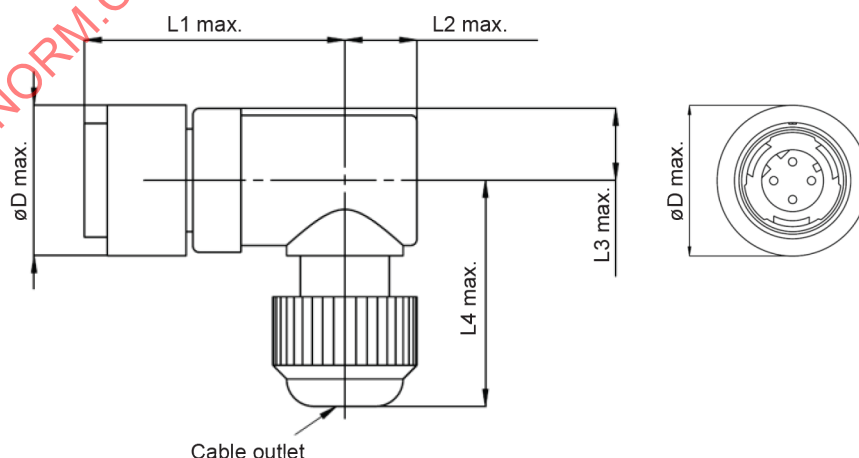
Style KF_PPI_PPO – Rewireable connector, with female contacts, right-angled version, with inner and outer push-pull locking
